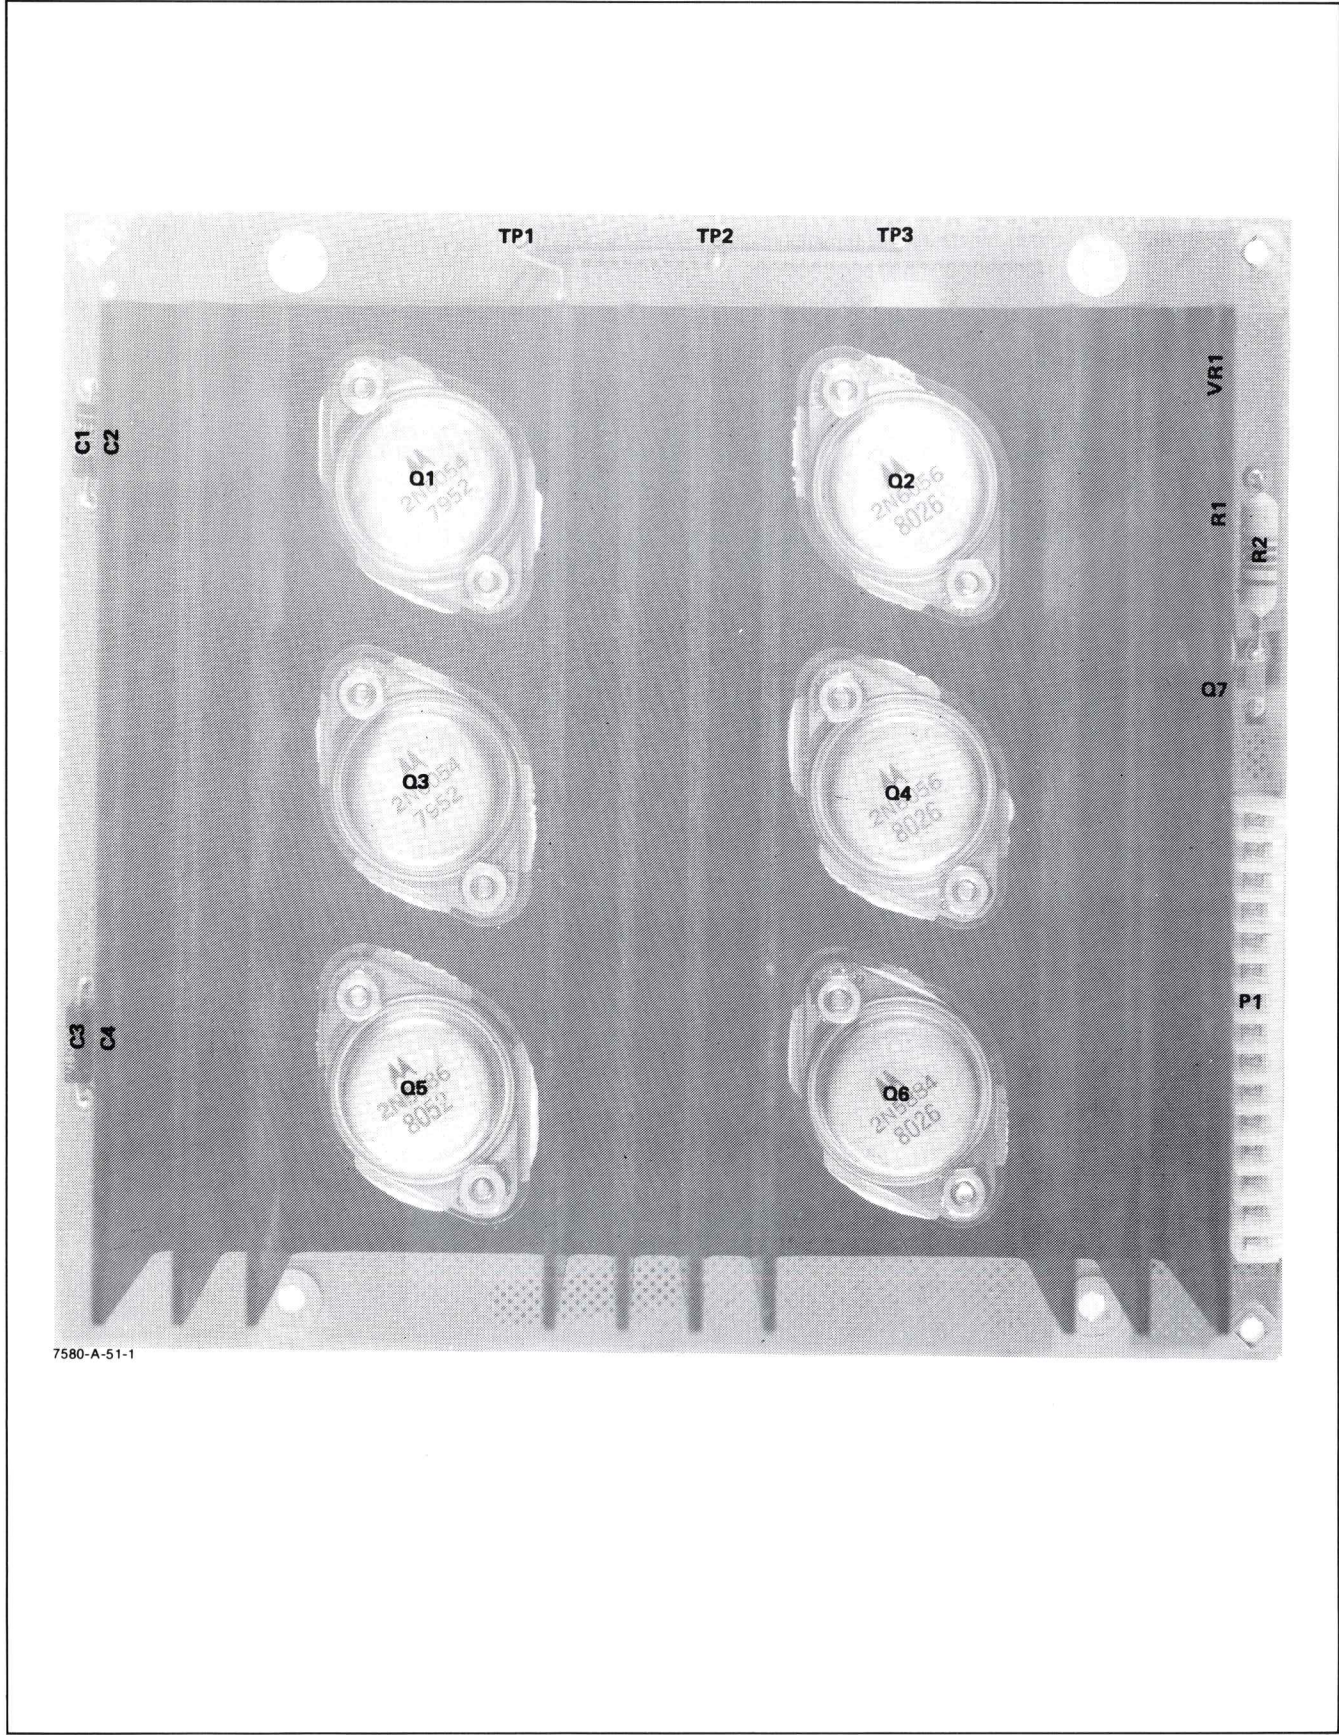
Motor Drive Transistor PCA A9, Component Identification Diagram
